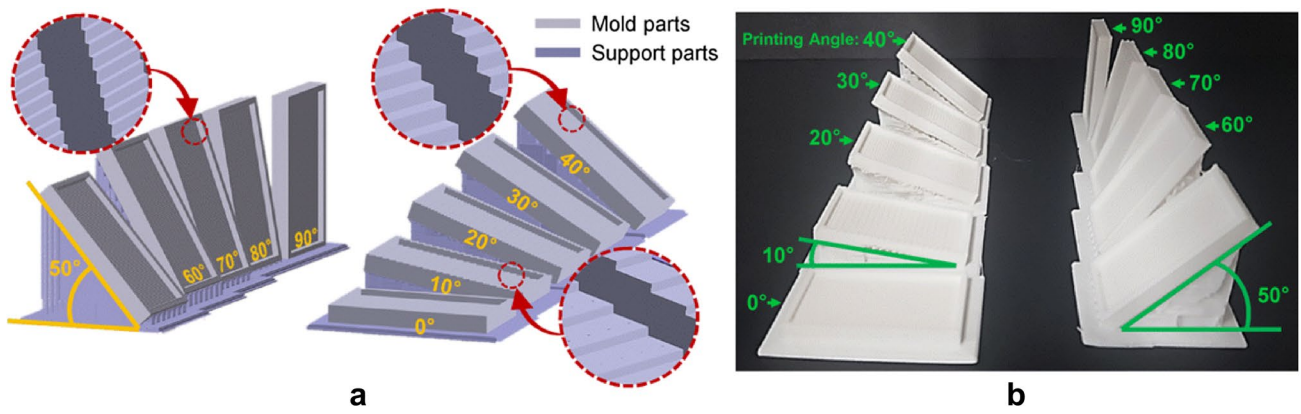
a CAD images of main 3D mold parts on support parts with respect to various printing angles and b actual image of mold products printed by a 3D printer. Different printing angles create different staircase-shaped microstructures on the mold surface owing to
